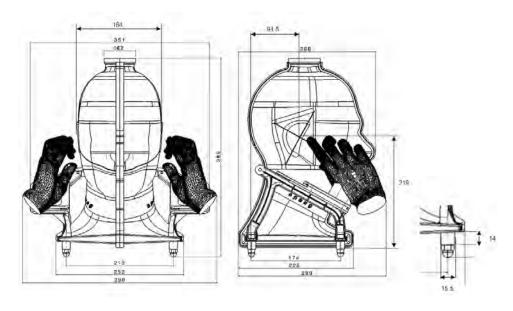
Dimensions of the head with hand fixture/positioner and hand phantoms (mm)
